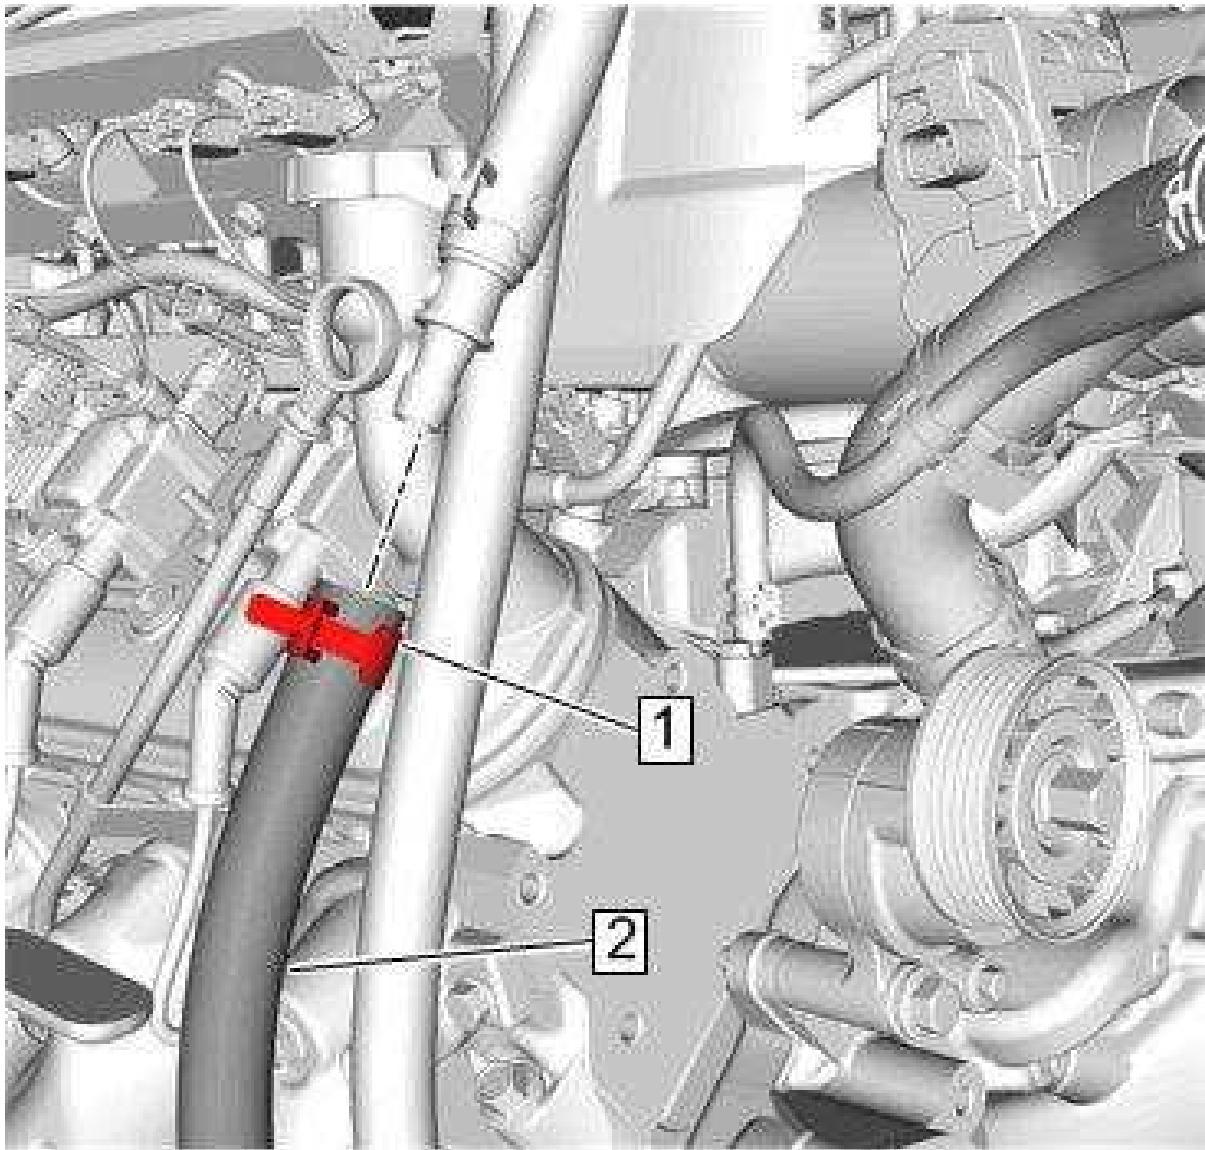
Radiator Surge Tank Outlet Hose Clamp at the Heater Inlet Hose
